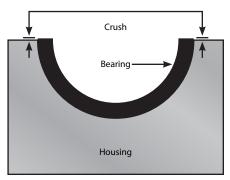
Bearing crush keeps the bearings tight in the receiving hole.
